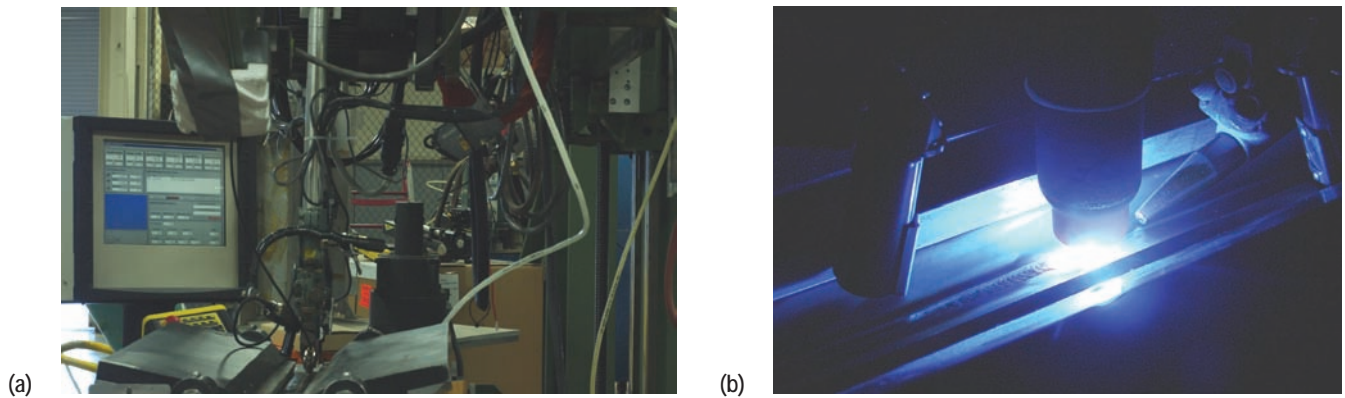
Weld setup with (a) the AMET system and (b) clamping fixture.
